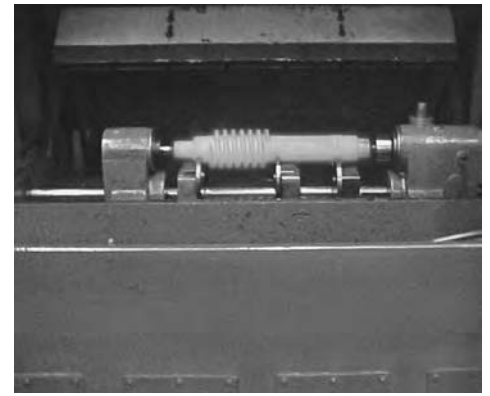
Image of worm gear loaded into a roller-die quenching machine. After the machine guard is lowered, the flow of quench oil is initiated to uniformly quench the part as it rotates between centers. Courtesy of The Gleason Works, Rochester, NY
